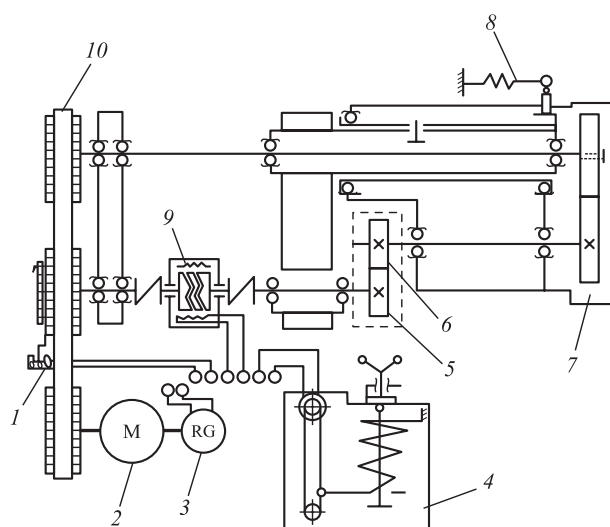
Basic kinematic scheme of the 2070 CMT-1 machine:
